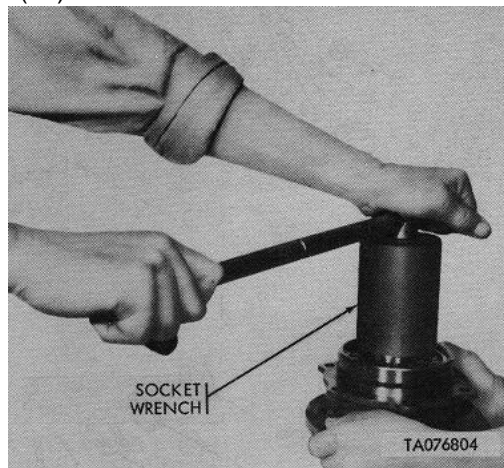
Bearing Cap - Retaining Nut Removal Using Socket Wrench
